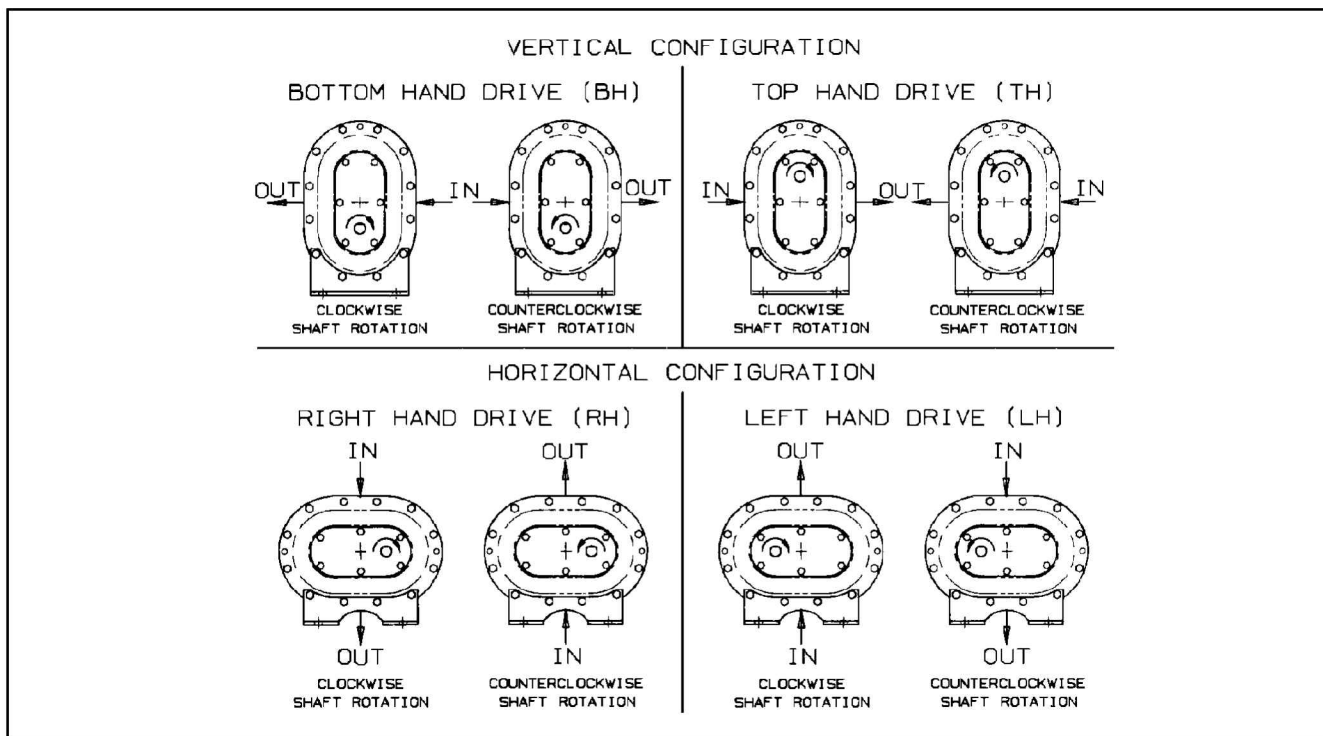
BLOWER MOUNTING CONFIGURATIONS
